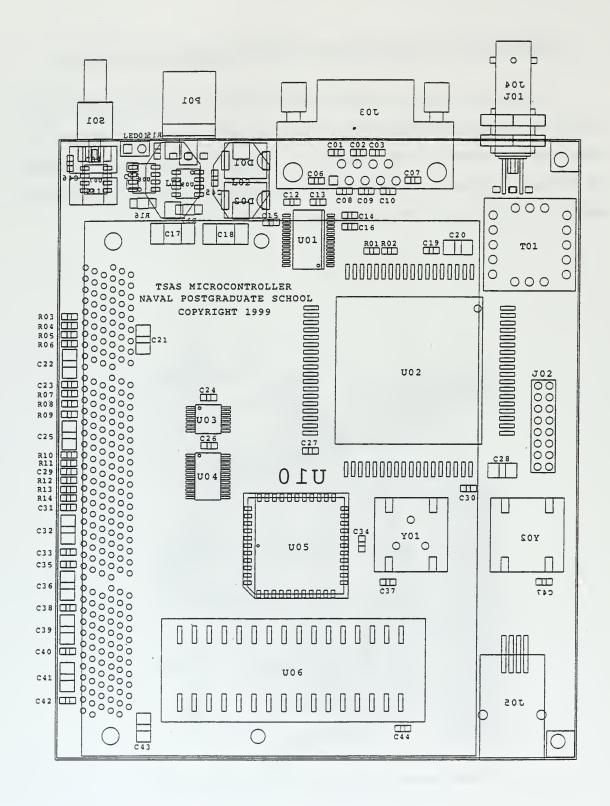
TSAS Microcontroller PCB, Top and Bottom Side, Without Etch
